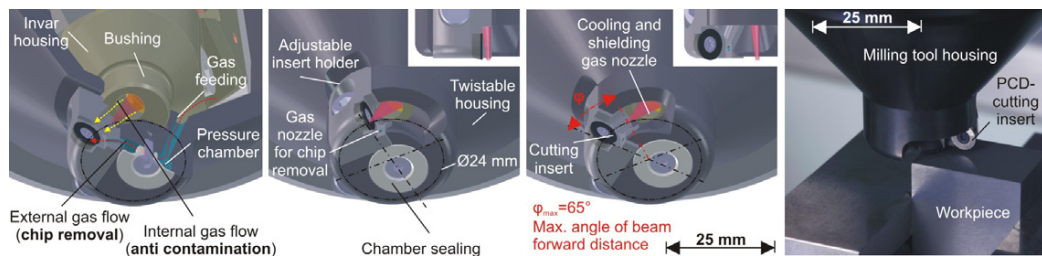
Detailed system design of auxiliary devices for shielding, cooling and chip removal by process gas; variable laser beam forward distance for adjustable material preheating and plastification; picture of implemented tool design
